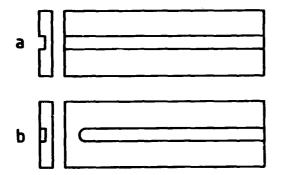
Machining grooves in a through-lead operation (a) possible with standard machines (b) not possible with standard machines
